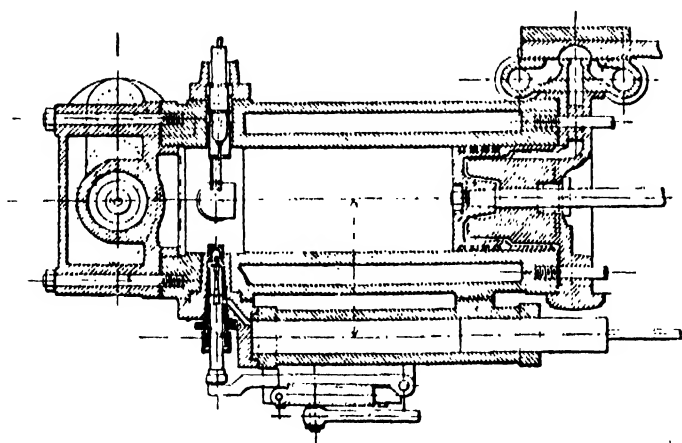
Sectional Plan through Benz Engine Cylinder
